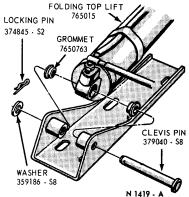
Folding Top Lift Cylinder Lower Pivot
